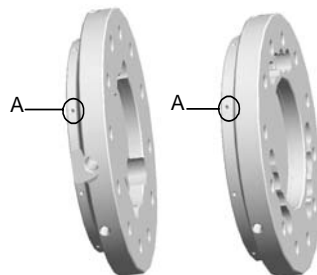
Seven holes A, on a radius of x mm from axis 6 center on the two standard tool flanges.
